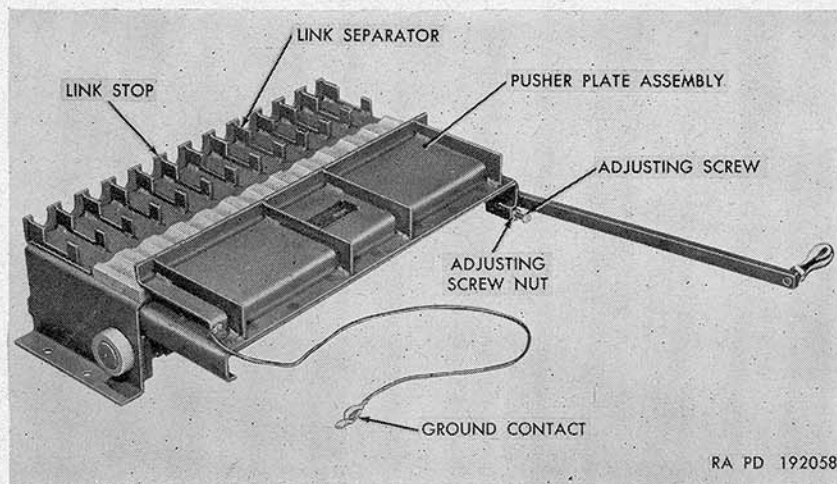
20-mm and cal. .60 linking machine T38—rear view.
